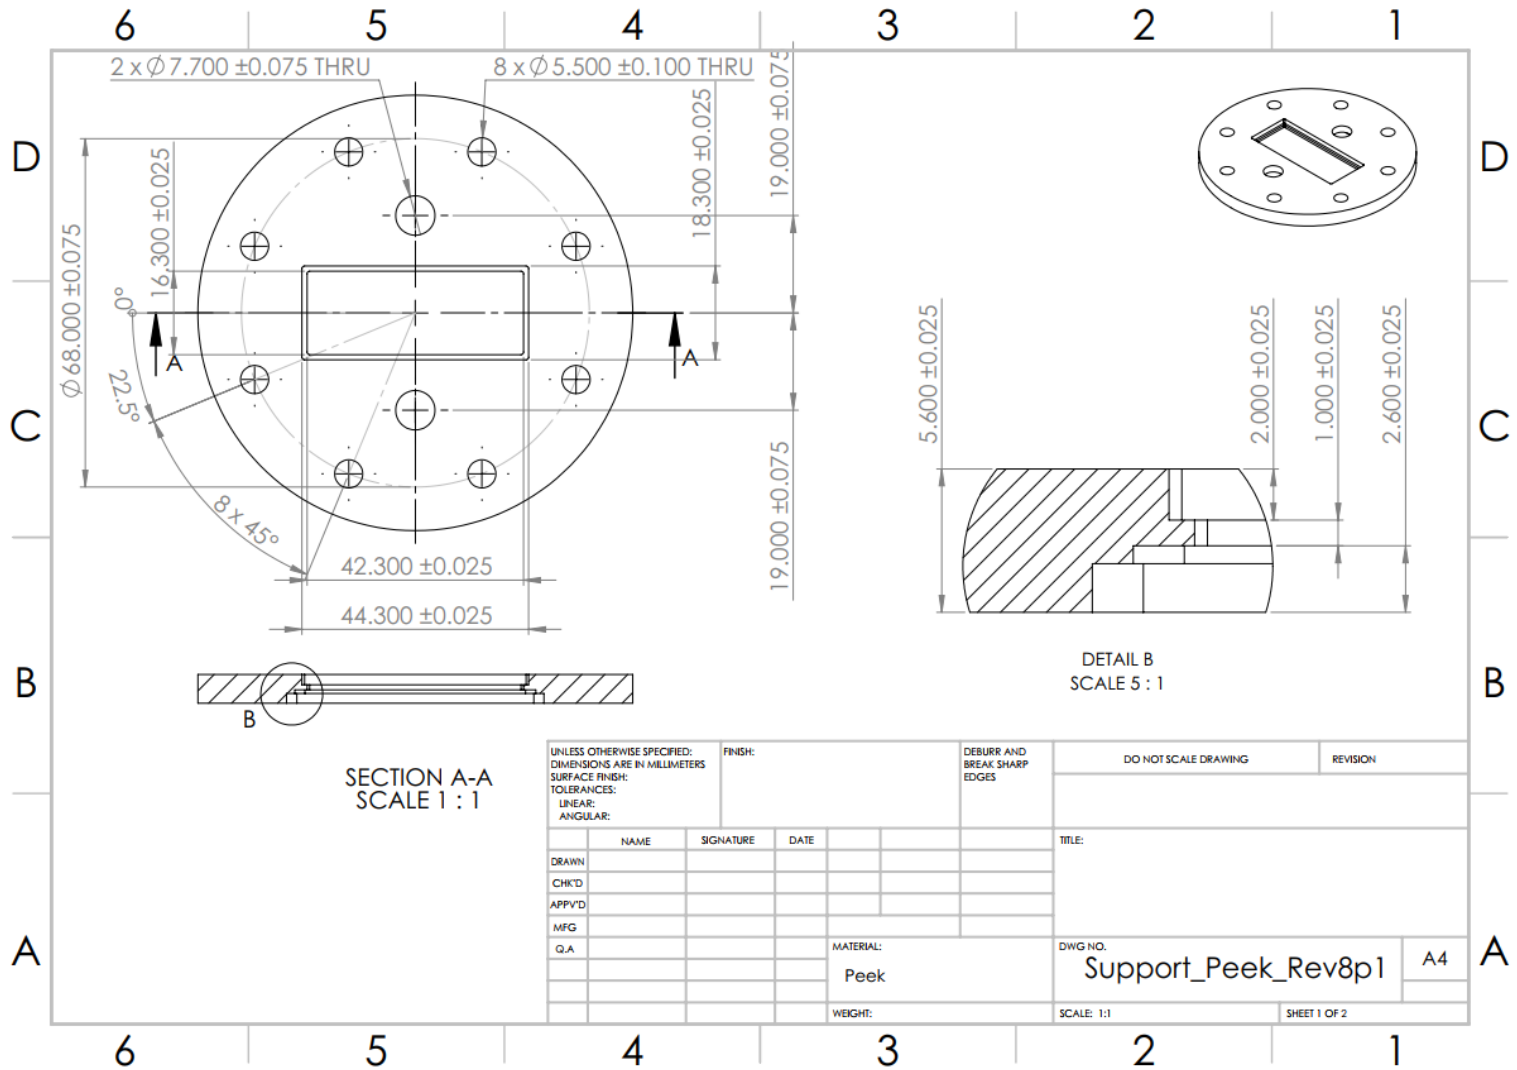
Page 1/2 for mechanical drawing of PEEK support structure.
